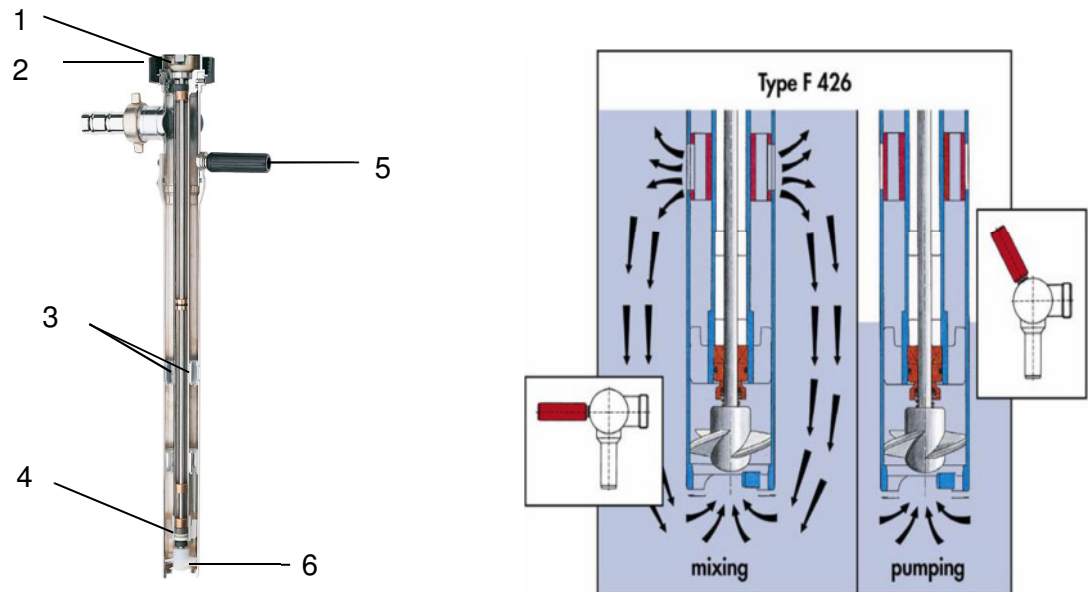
Cross-section of F 426 S and operating principle (sample view)
